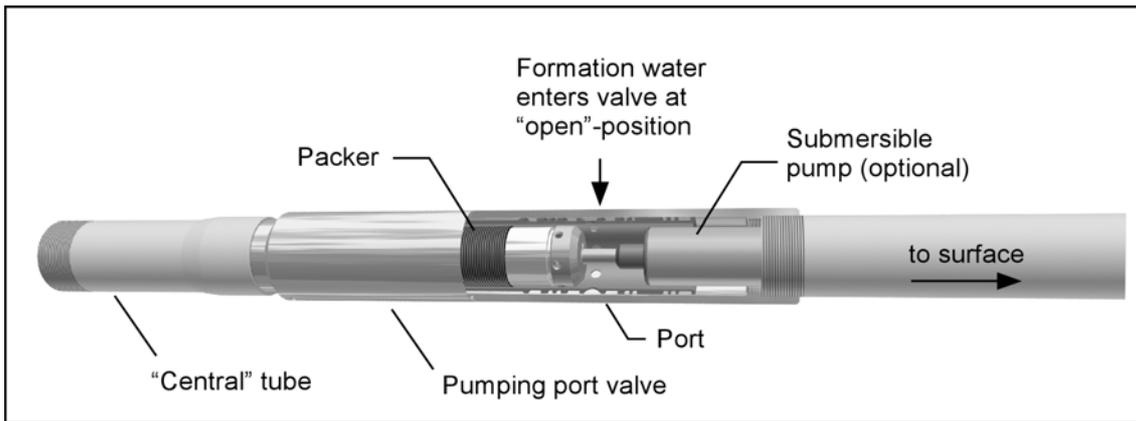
Pumping port valve in "central" tube shown with valve open/close packer.
